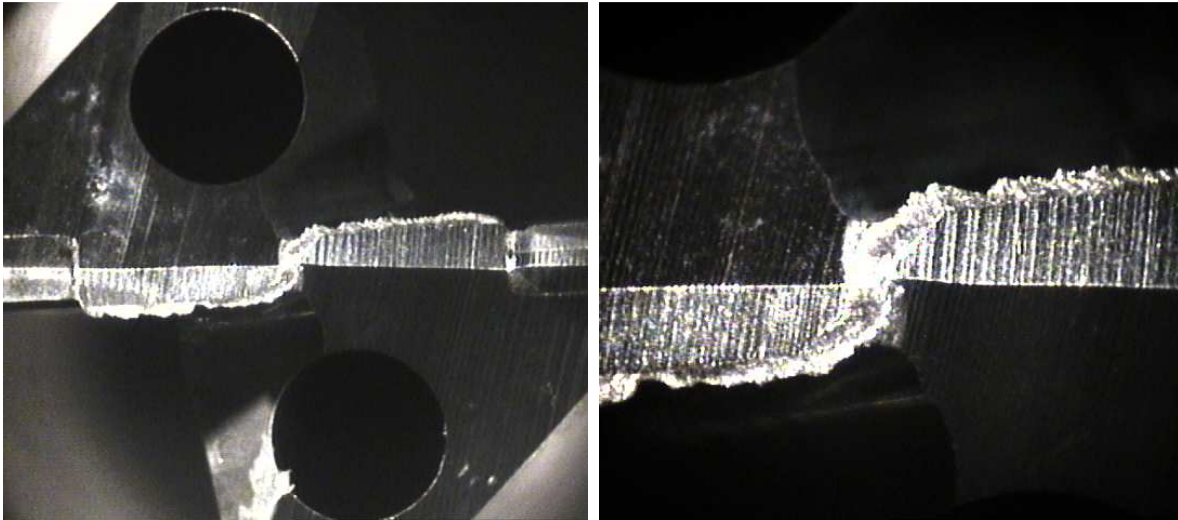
Excessively coarse grind of the flank (relief) faces of carbide part of the drill.
